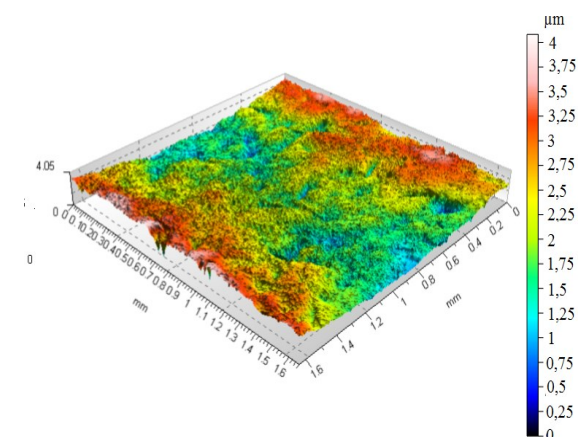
3D optical surfaces of the casting after vibro-abrasive grinding on 180 min. and polishing on 180 min., *Sa* = 0.54 µm
